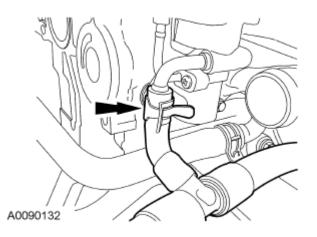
Locating Coolant Tube Retainer Courtesy of FORD MOTOR CO.
